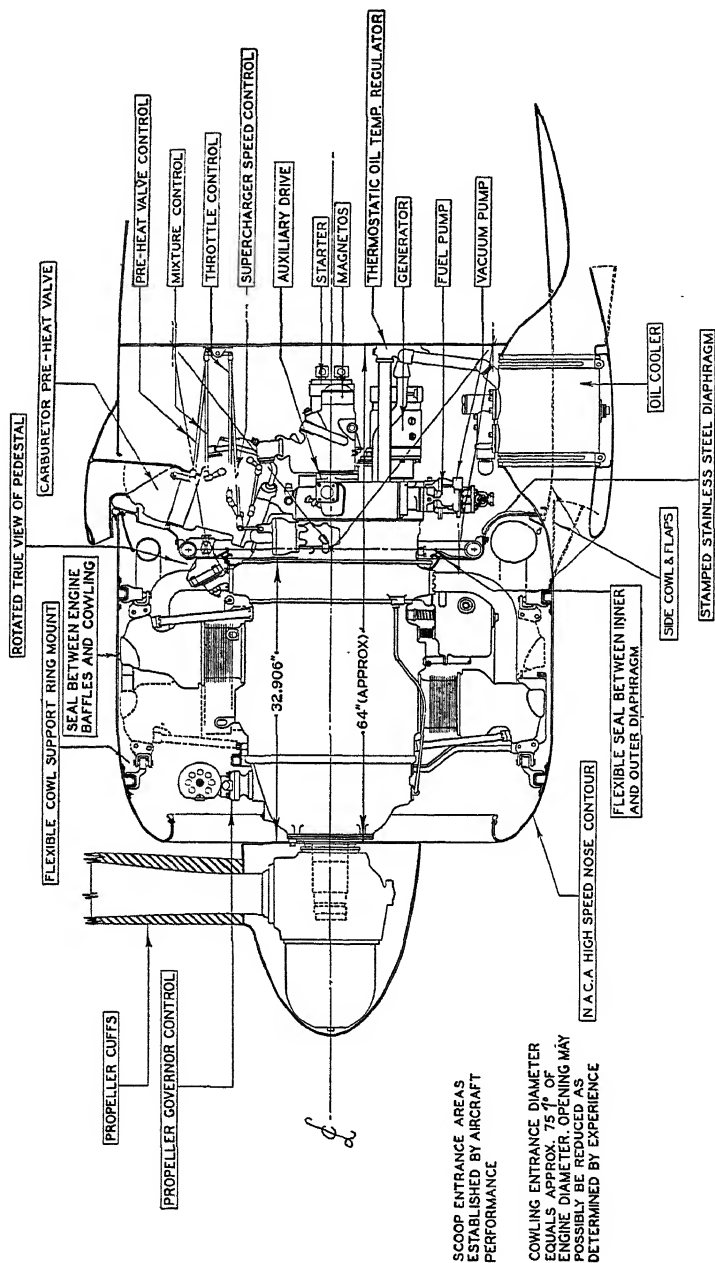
Longitudinal section through an engine installation forward of the fire wall. (*Pratt & Whitney Aircraft.*)
